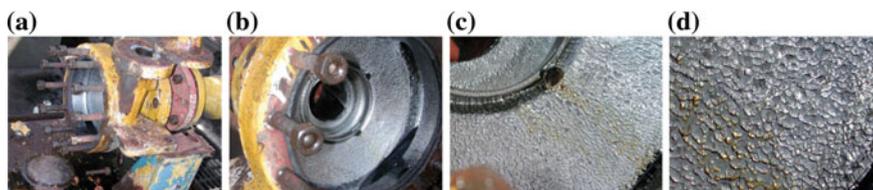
a General view of failed pump casing made from cast iron pumping lean amine (DEA). b–d Inner surface of the pump house (erosion-corrosion)
